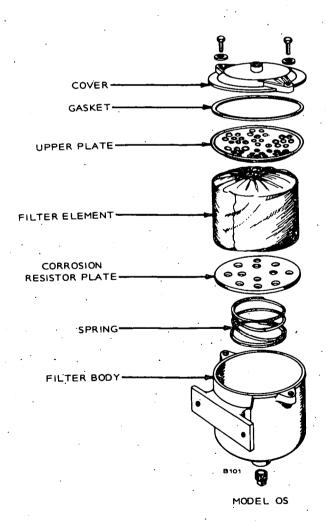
CHANGING CORROSION RESISTOR ELEMENT AND PLATE
